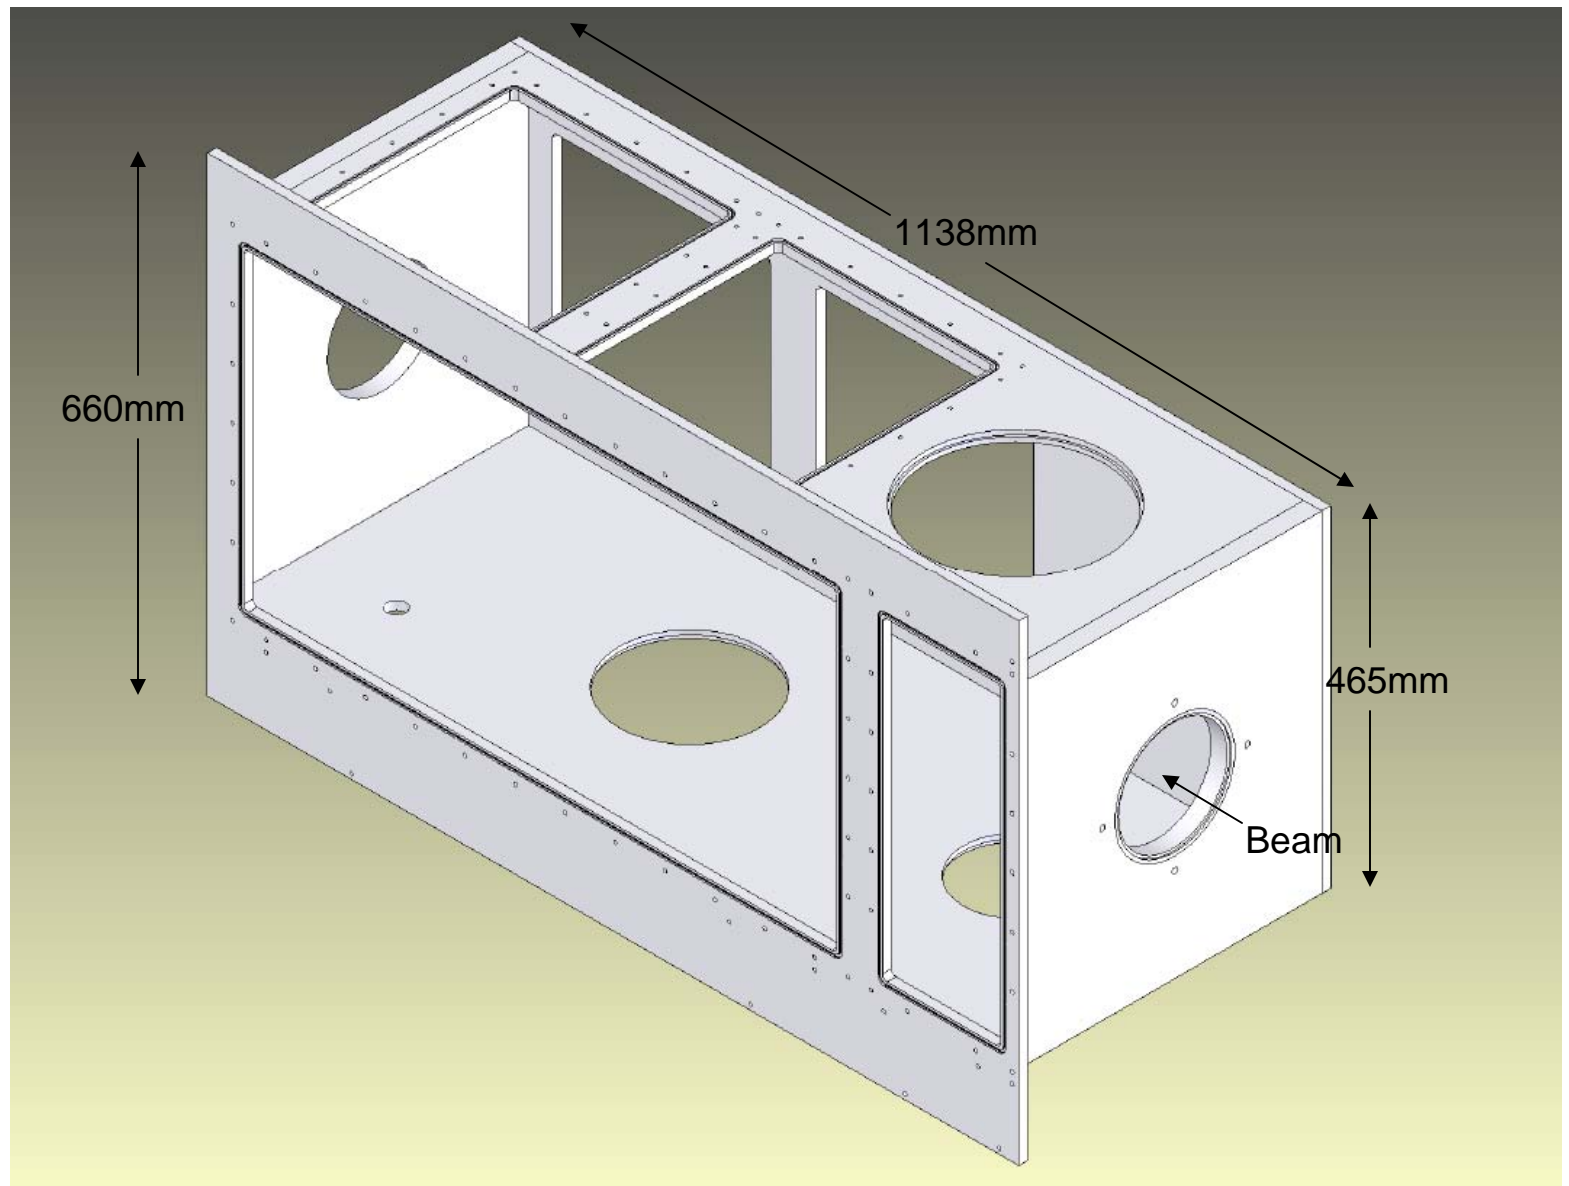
IRIS Scattering Chamber. Welded Stainless. Large and small detector flanges (DS and US). Four other large access holes etc. Structural analysis for vacuum loading about to start.
